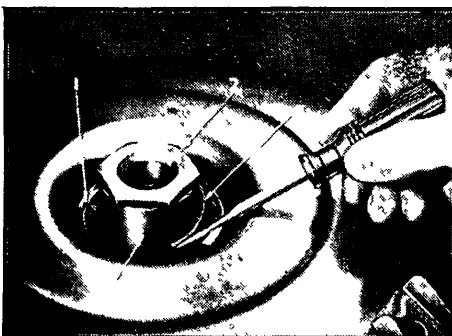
E Removing retainer snap ring from fluid drive, 1939-52
